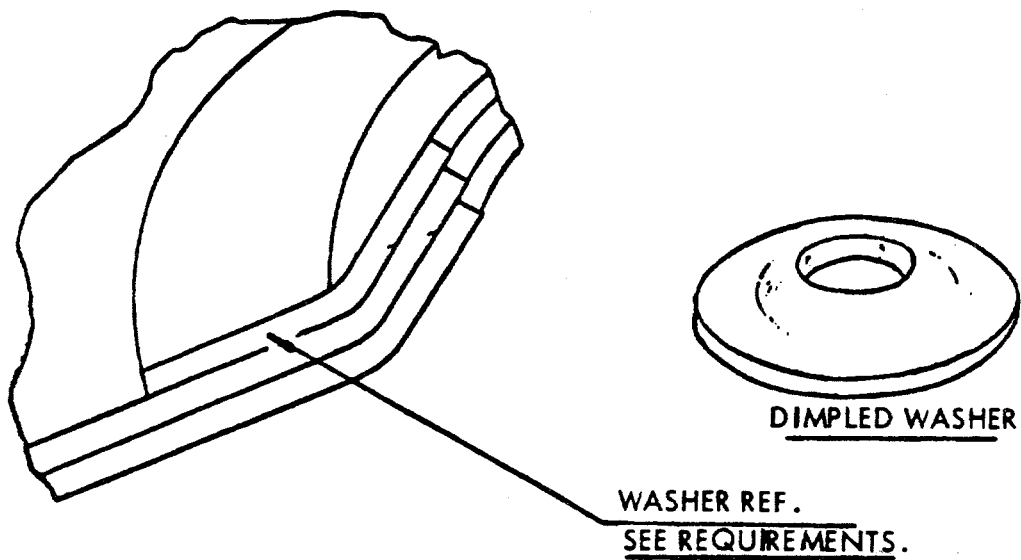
CRACKED RIVET DIMPLES
